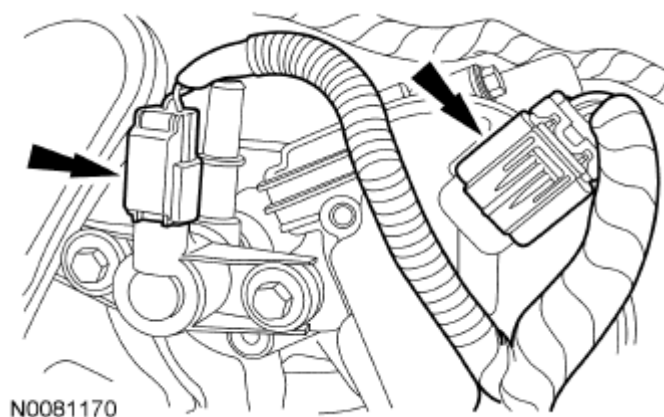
Locating Electronic Throttle Control And Evaporative Emission Canister Purge Valve Electrical Connectors
